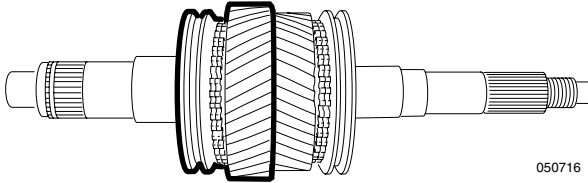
Fitted position 1st gear and 1st/2nd synchro unit
